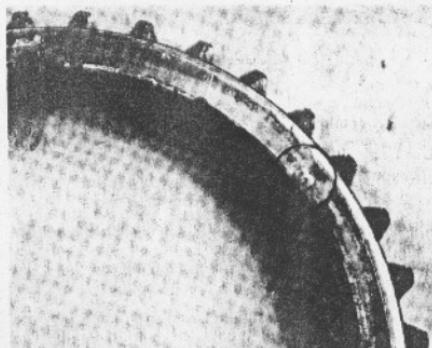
Blocker ring with small "B" imprinted on ring at small end of cone.
